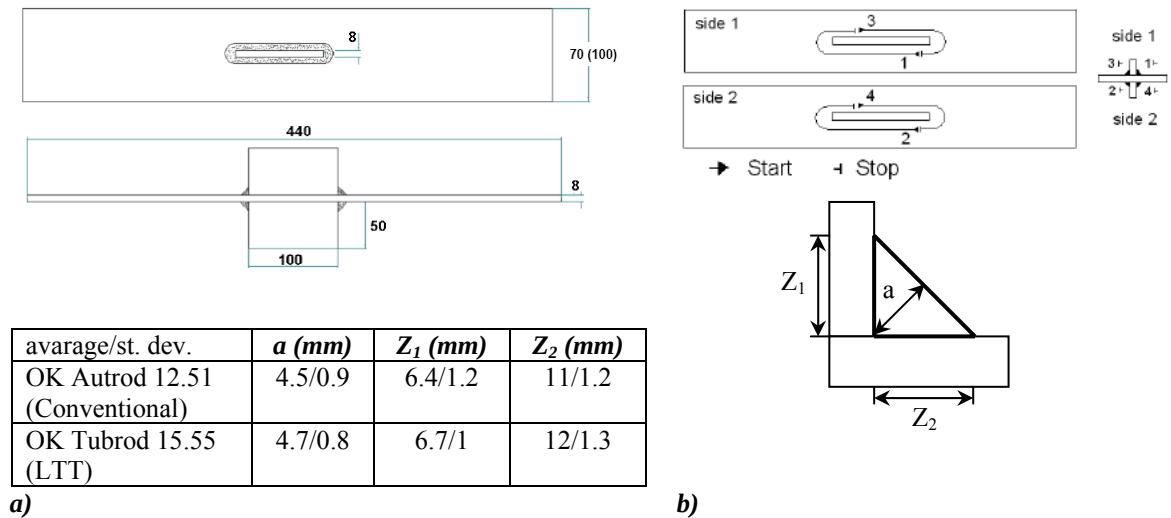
Welded specimens: a) Global and local weld geometry dimensions; b) welding sequences.
